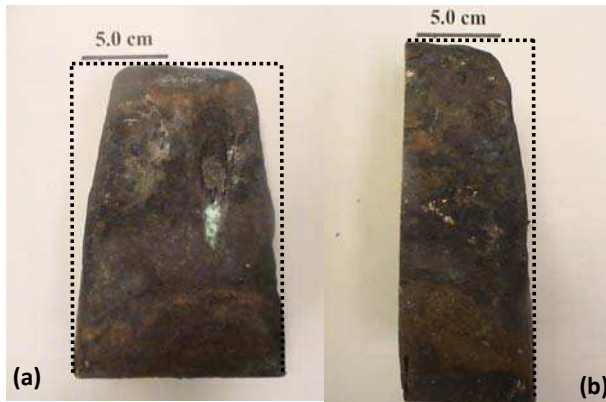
Hot end of water cooled copper finger after being removed from a flash furnace. (a) Front view, (b) lateral view. The dotted lines represent the original dimensions of the cooler.
